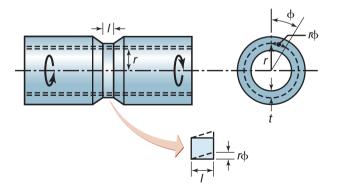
A typical torsion-test specimen, mounted between the two heads of a testing machine and twisted. Note the shear deformation of an element in the reduced section of the specimen.
